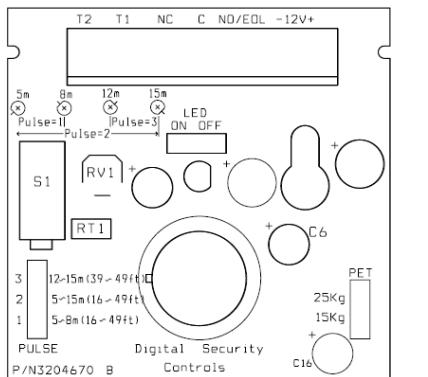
PCB LAYOUT / Parti della Scheda Elettronica
